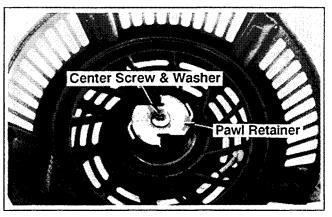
Center Screw, Washer And Pawl Retainer.
